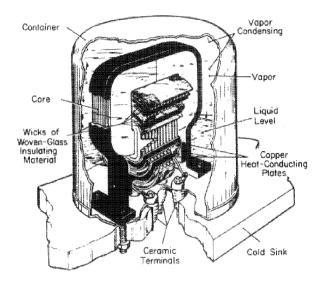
(Courtesy of Raytheon Corporation.) Cutaway view of fluorocarbon cooled transformer.
